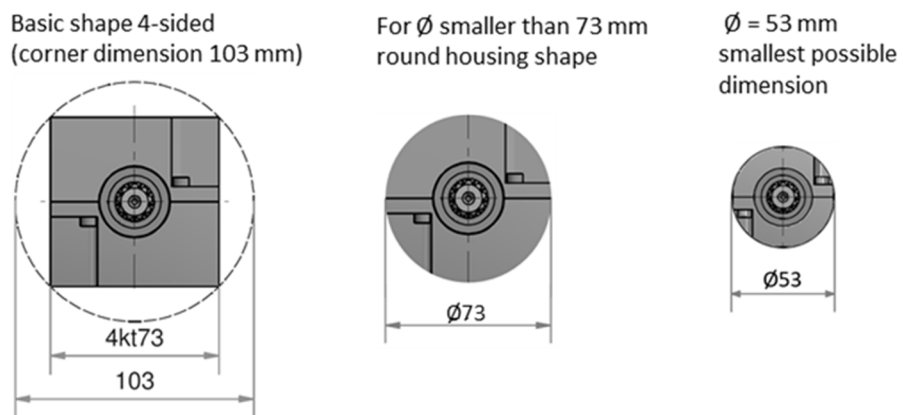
Dimensions of the drive system 3062.00-V01XXX
